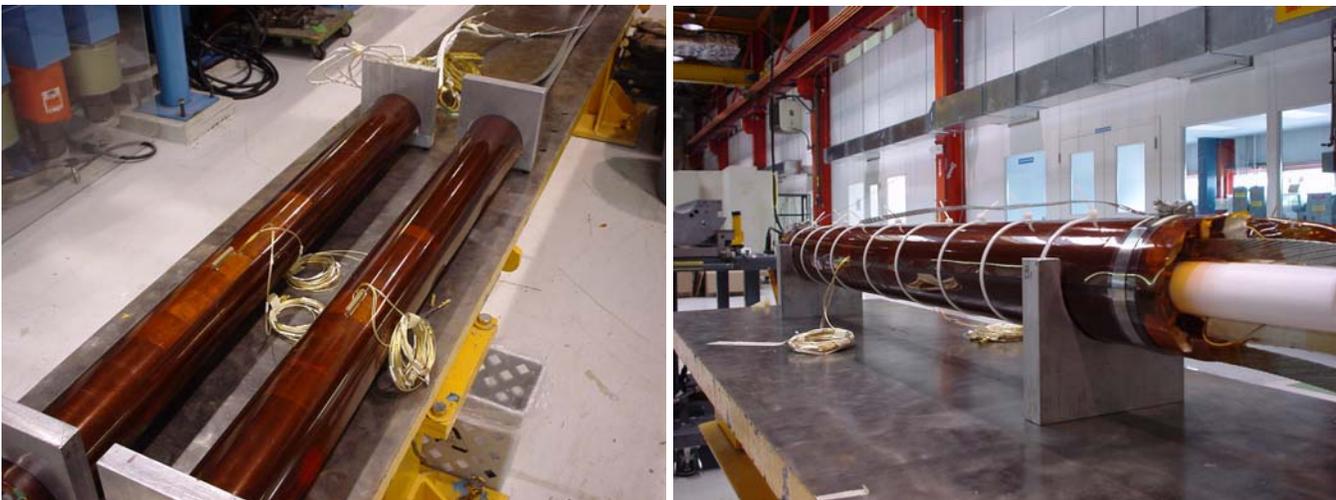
Layout of spacers with resistive gauges in the magnet straight section.
